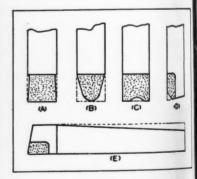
Drawing Showing How Hundreds of Special Tool Forms May Be Produced by Simple Grinding Operations on Carboloy Standard Tools
